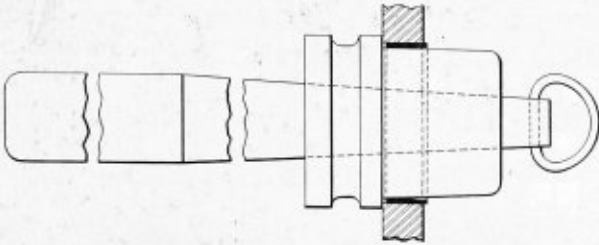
Setting Copper Ferrule in Tube Sheet
